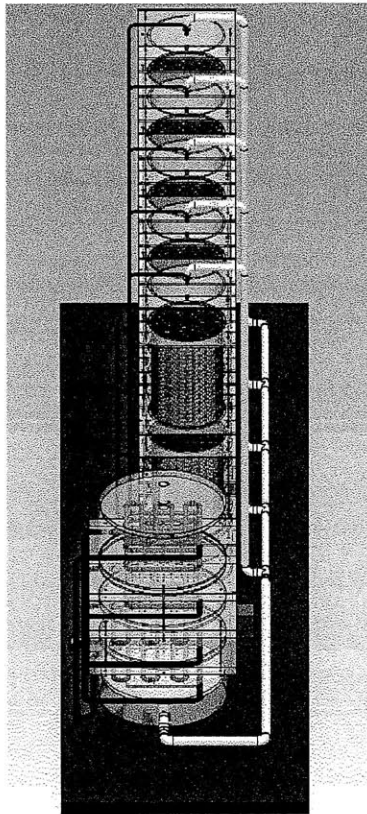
6: Full SDS Solid Model Assembly – Back View
